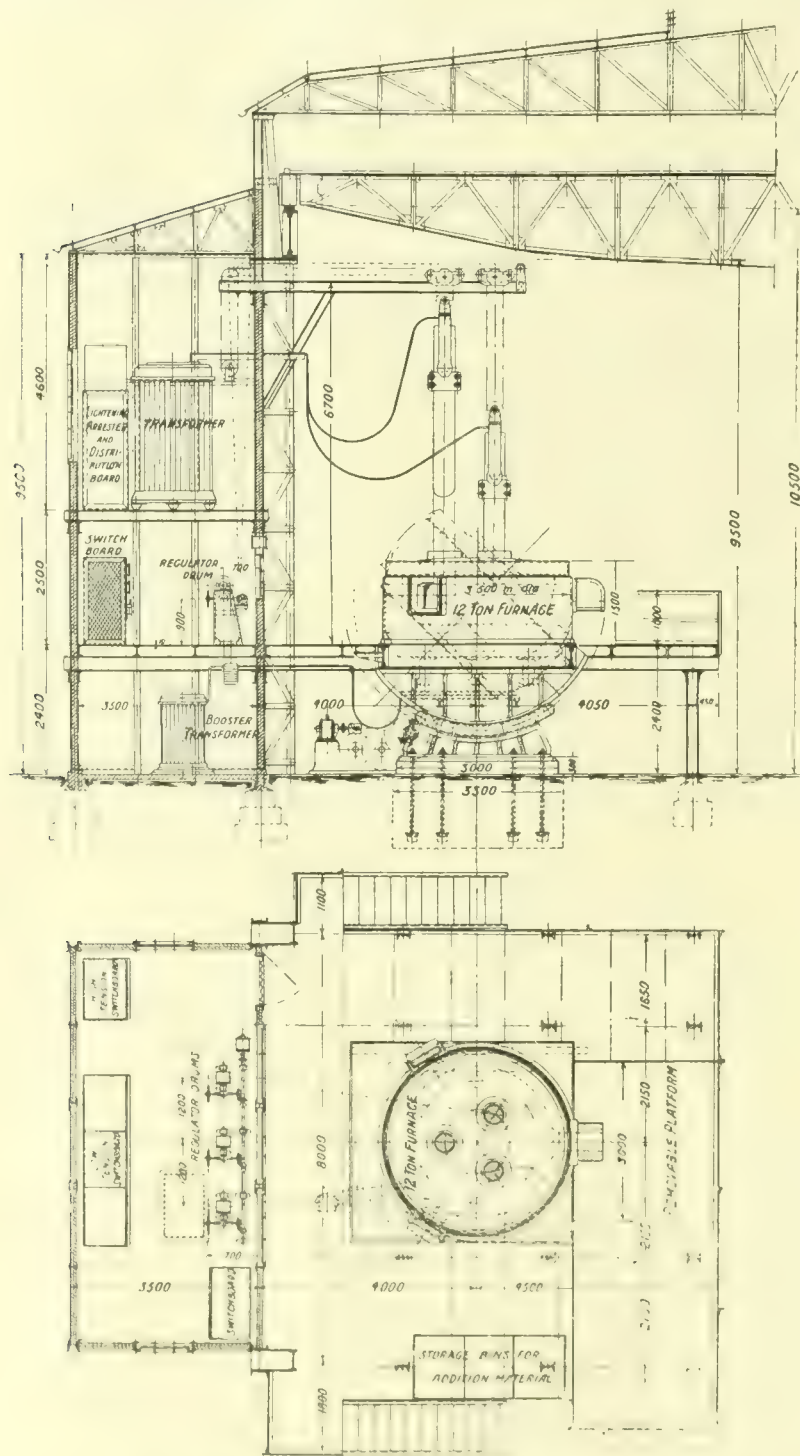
ELEVATION AND PLAN OF 12-TON INDUCTION FURNACE.
